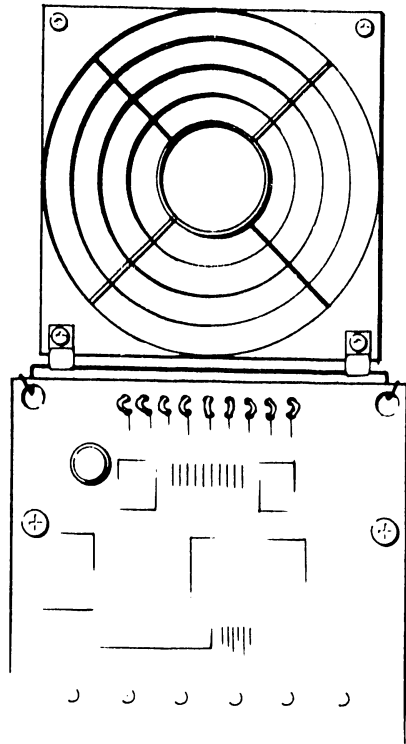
FRONT PANEL MOUNTED ON CHASSIS
